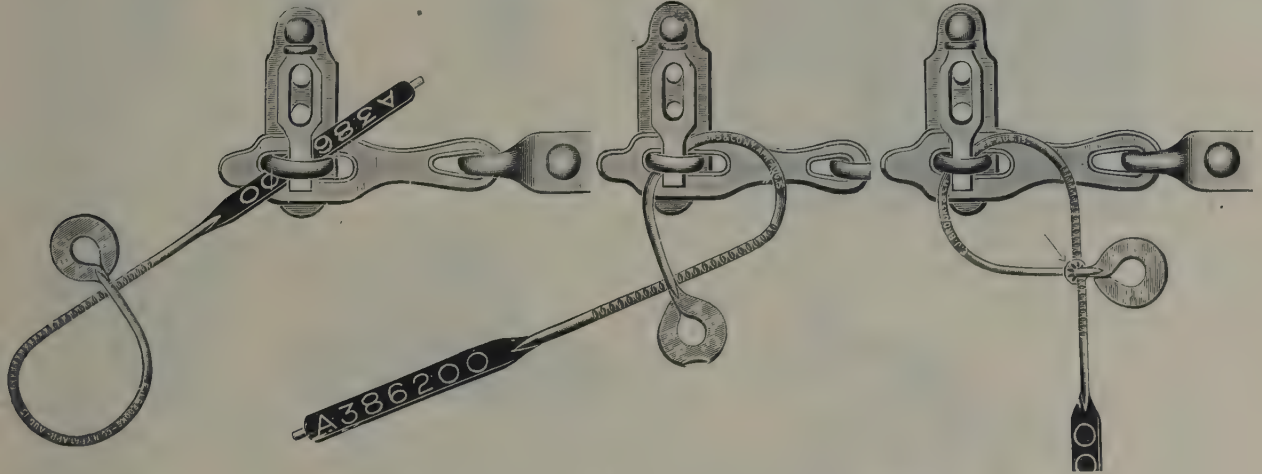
Twist Lock Car Seal. E. J. Brooks & Company.
